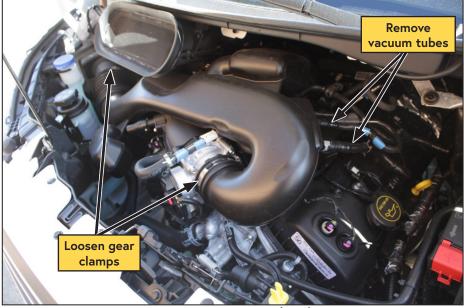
Remove intake tube ☐ Loosen the 2 gear clamps on the intake tube (Figure 9).
